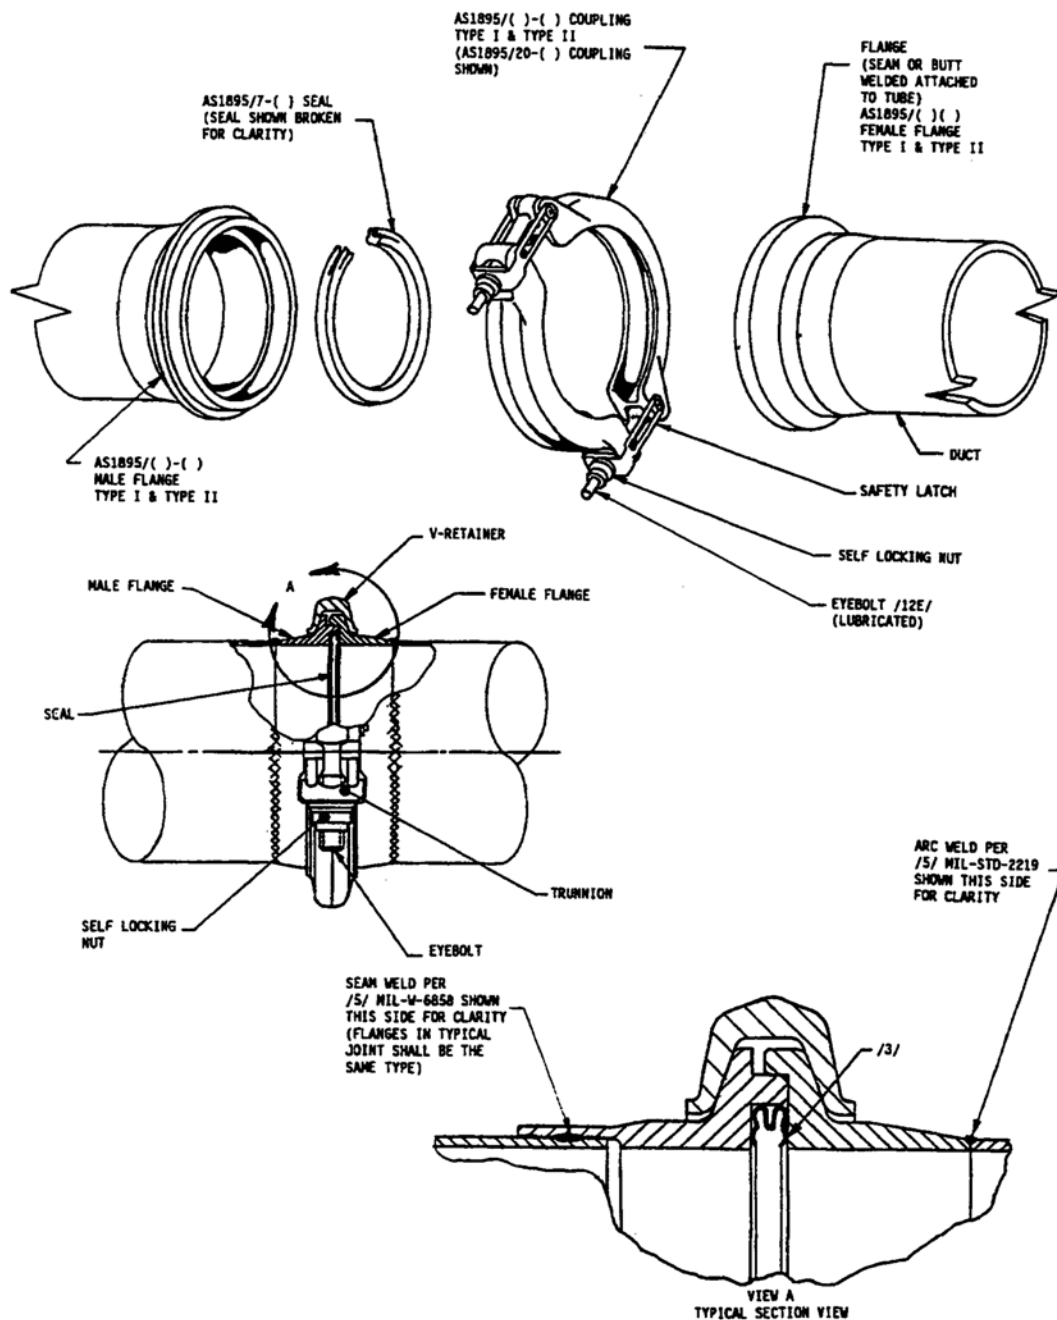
AS1895 COUPLING FLANGES AND SEAL
